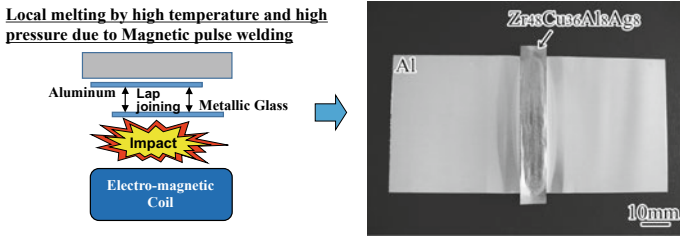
Aluminum/glassy alloy lap joints fabricated by magnetic pulse welding. Reprinted from Ref. [27], Copyright 2009, with permission from the Japan Institute of Metals and Materials
